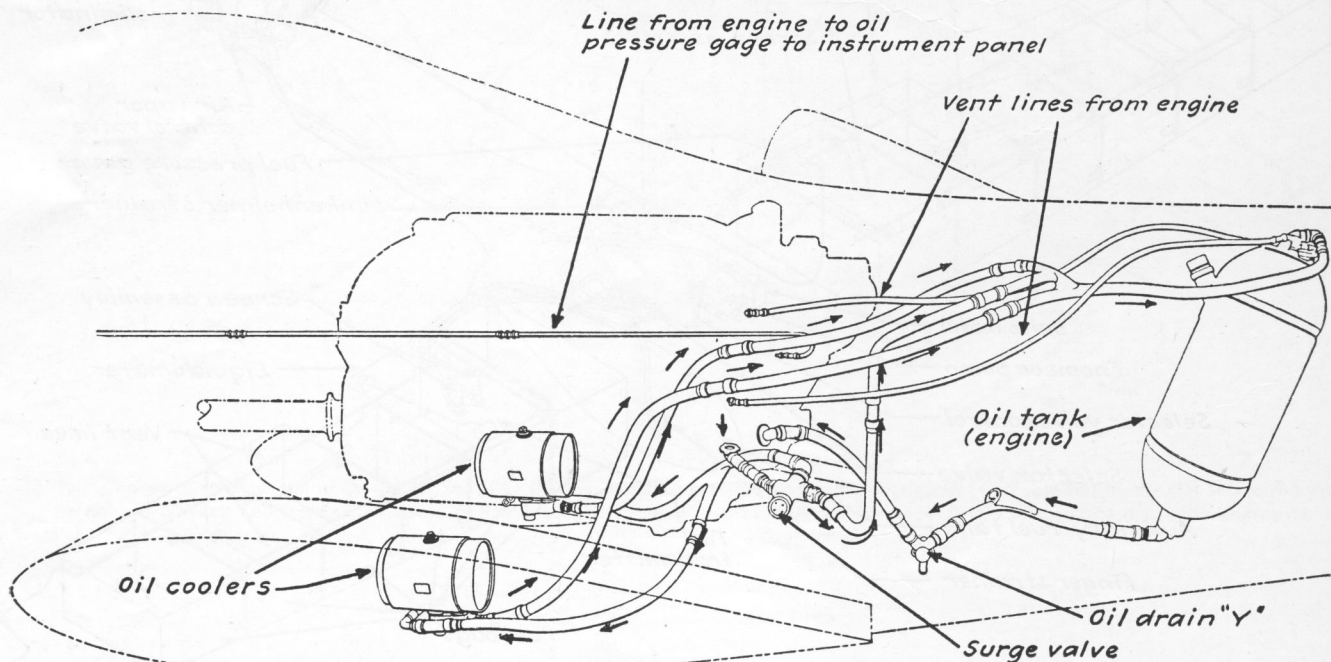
System for circulating engine oil in the Bell P-39. The propeller reduction gearbox is lubricated by a separate system.
